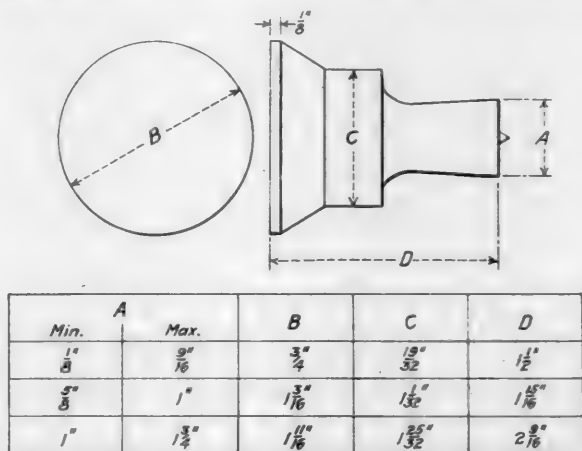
Only Three Sizes of Boiler Punch Heads Needed
